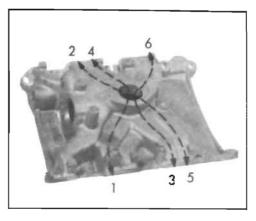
Intake Manifold Distribution - V-6 Engine
